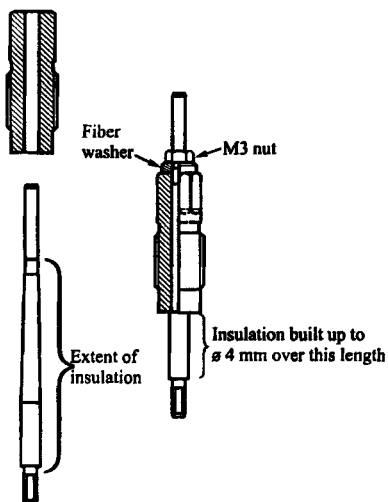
Electrical Lead Through Based on a Kistler Blank Transducer Body and a Modified Taper Pin
